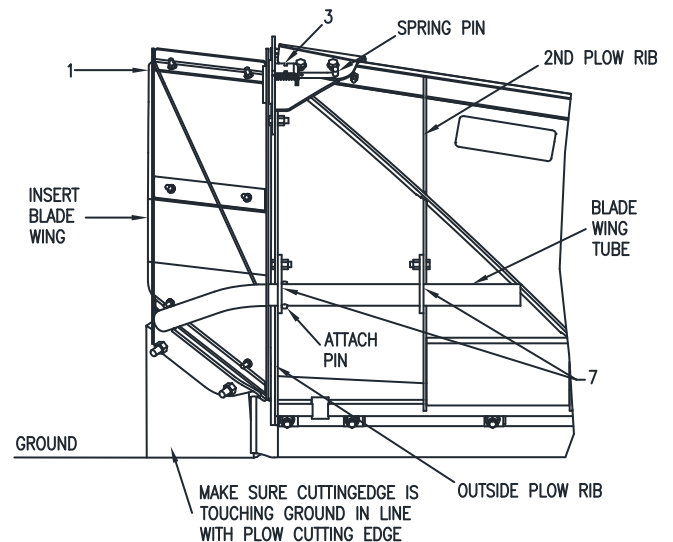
V-XT & DXT Wing Extension Assembly G10574
